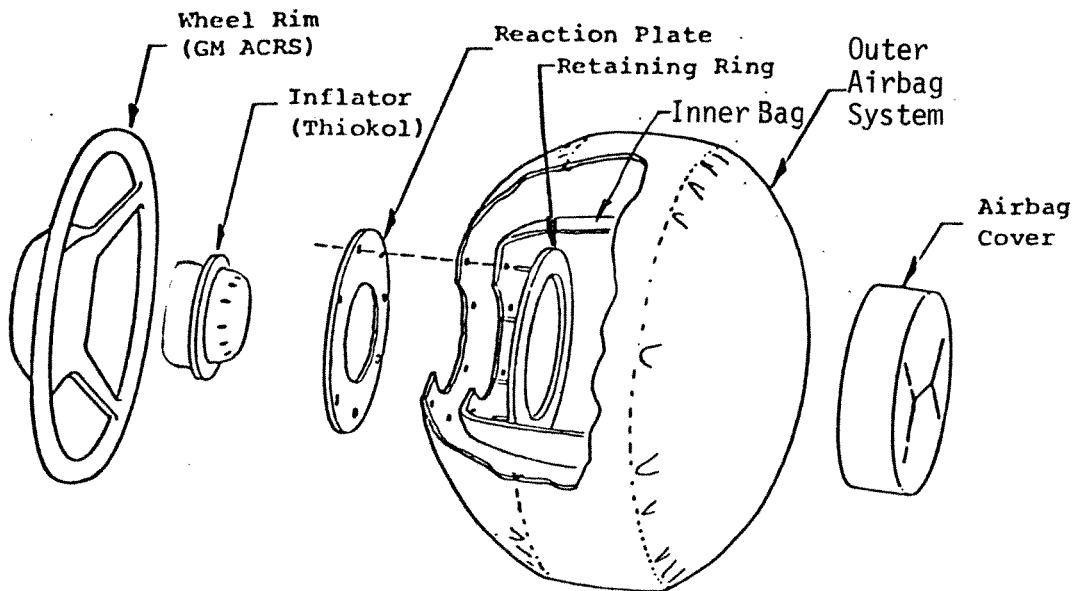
Steering Wheel Assembly Exploded View - Dual Airbag System
